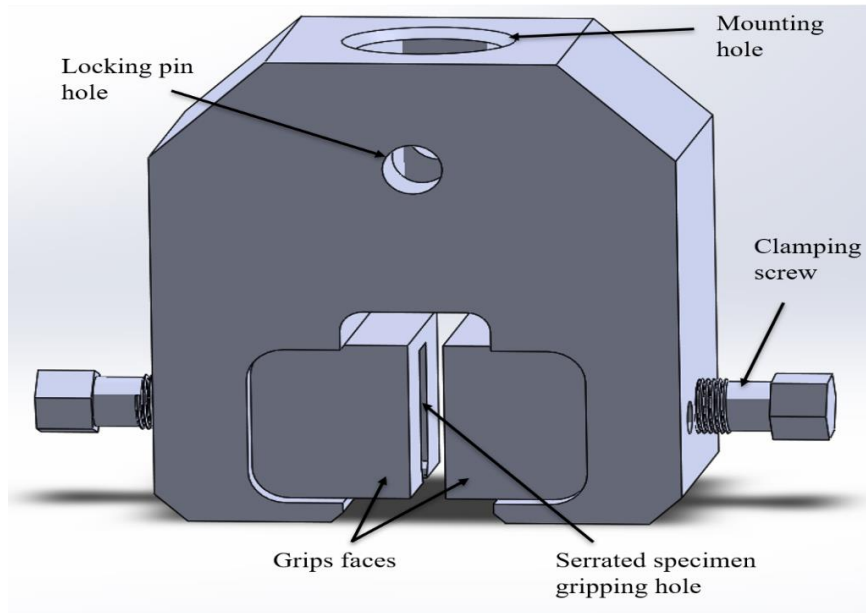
SolidWorks design of a U-shape vise grips and fixtures assembly with various components.
